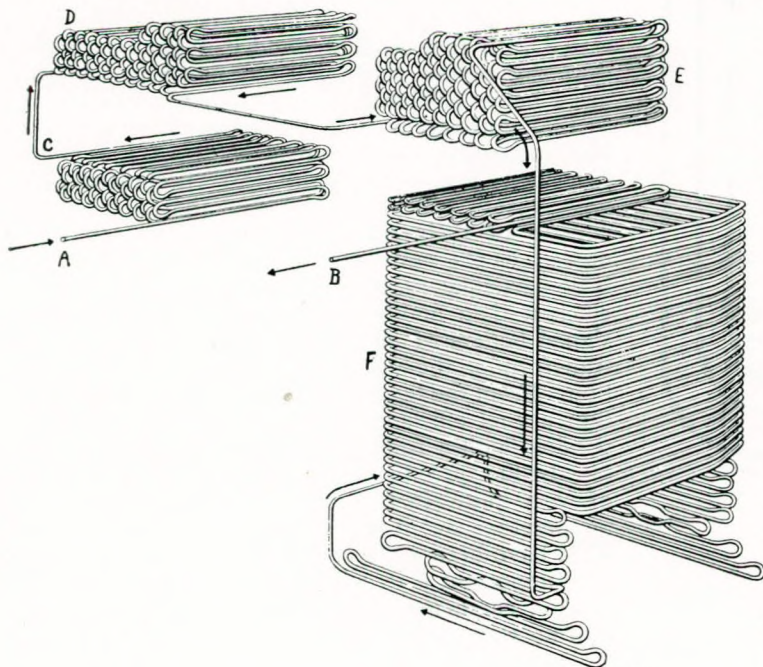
(left).—Tube system of Sulzer "Monotube" steam generator: (A) feed water inlet; (B) superheated steam outlet; (C, D, E) tube bundles which can be arranged to suit space available; (F) tube lining of combustion chamber.
